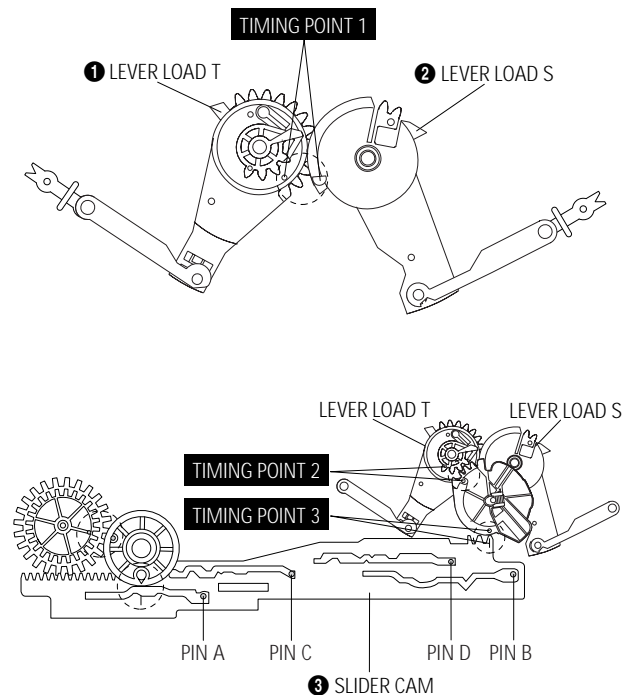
Gear Loading Drive, Slider Cam, Lever Load S, T Ass'y Assembly
